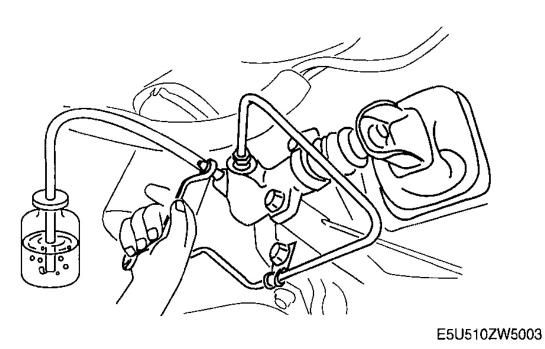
Identifying Clutch Bleeding Courtesy of MAZDA MOTORS CORP.
